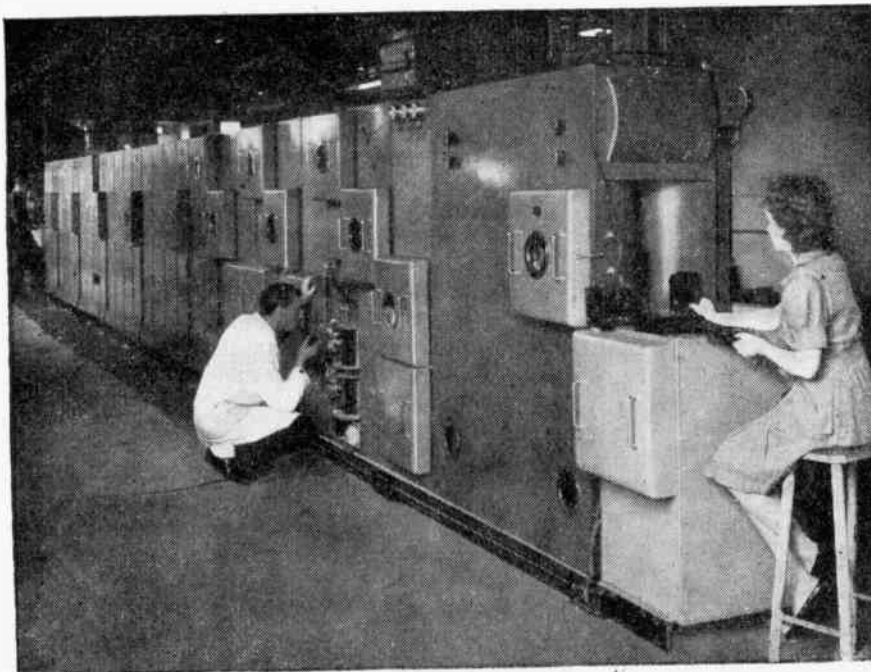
Type "A" conveyor, which incorporates the complete electronic circuit-making equipment. It embodies grit blasting, metalizing, face milling, lacquering an circuit testing units.
